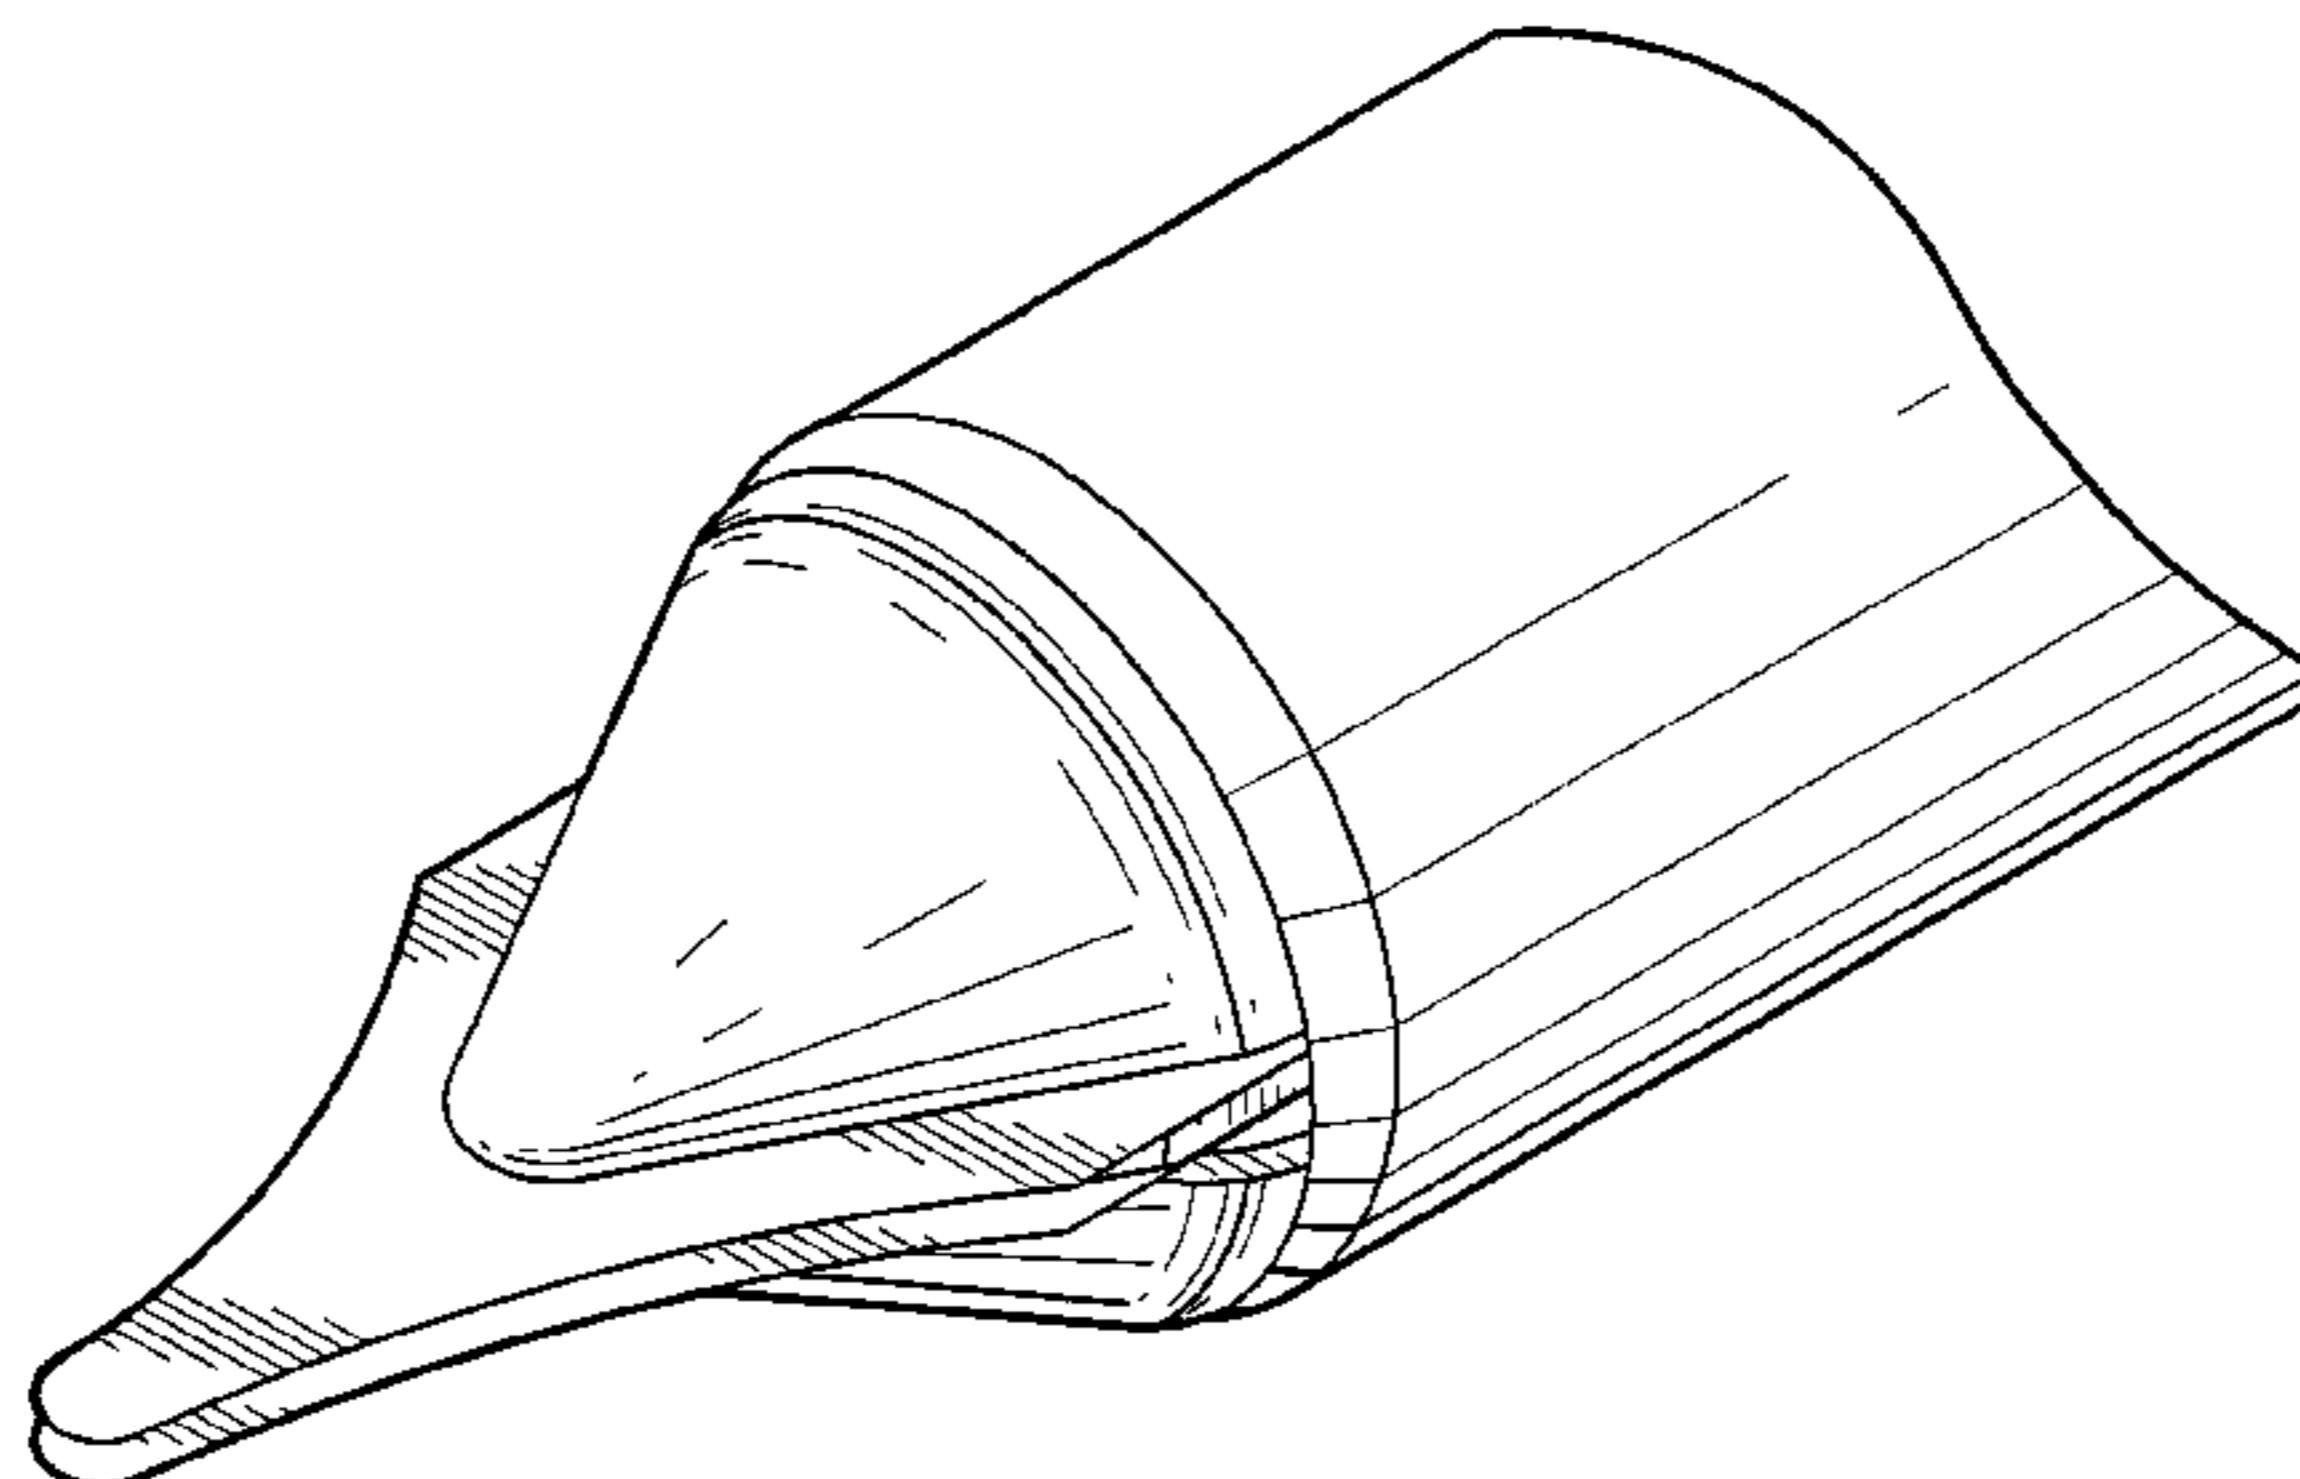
is a top, front and right side perspective view thereof, the bottom and left front perspective being a mirror image of the perspective view shown, the cutting tip being shown in a partially exposed position;
